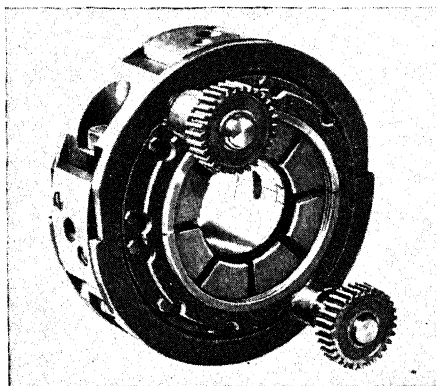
Combination journal and Kingsbury thrust bearing. (Courtesy Allis-Chalmers Manufacturing Company.)
